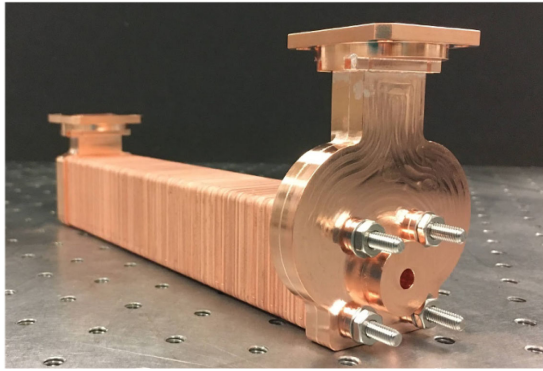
Assembled Stage III metamaterial power extractor at MIT prior to initial cold tests.
